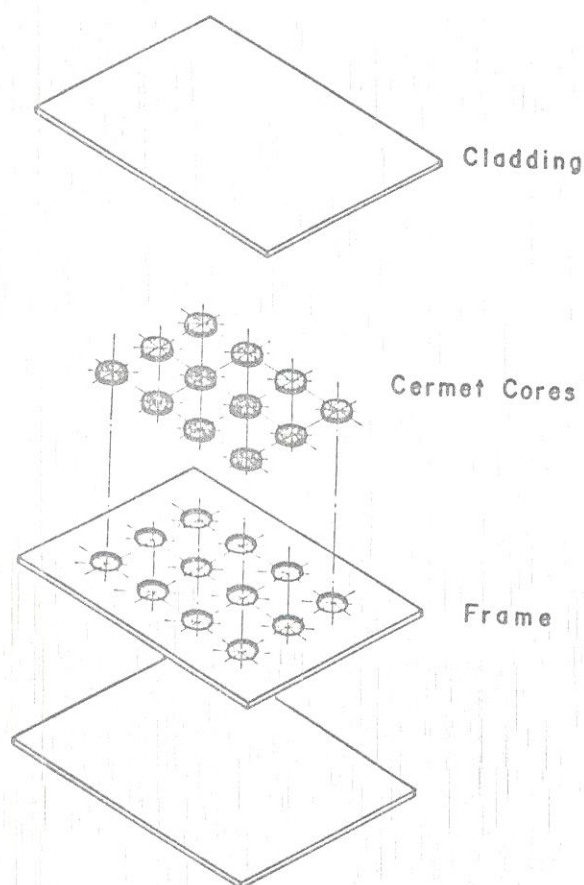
Schematic arrangement of cladding plates, frame and cermet cores prior to assembly.
